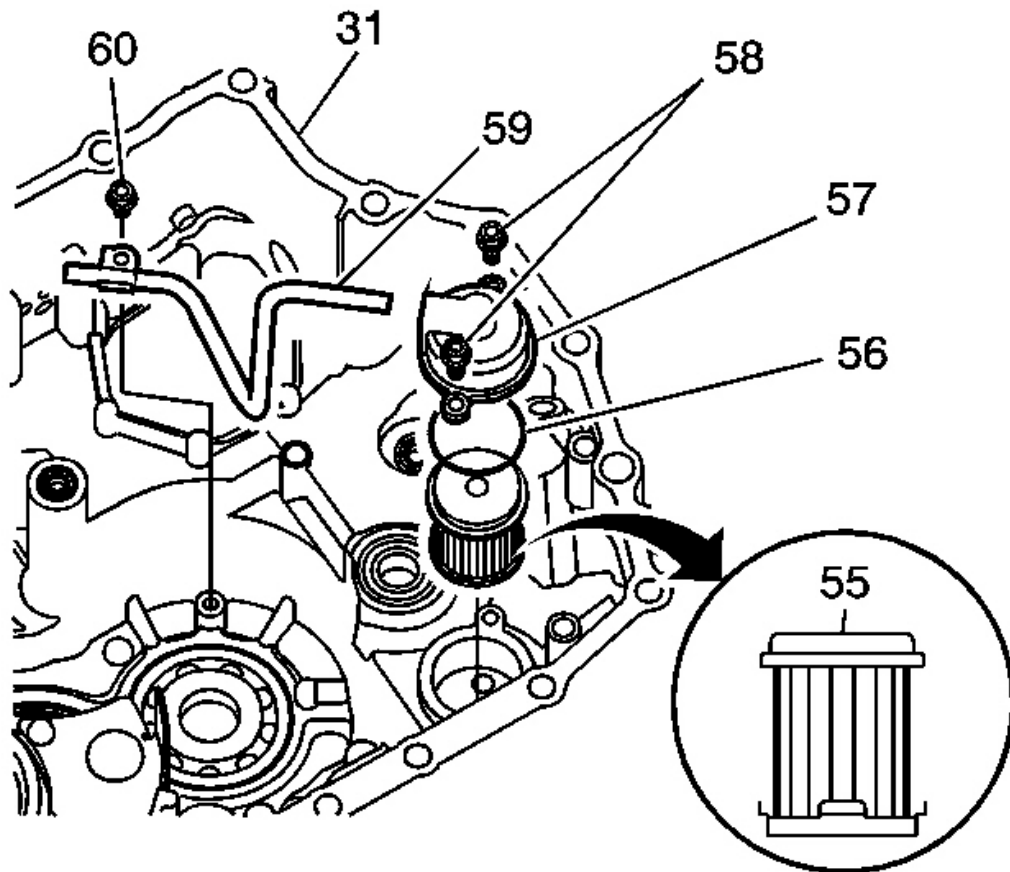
Lube Fluid Pipe, Bolt, O-Ring Seal & Fluid Filter Cover
